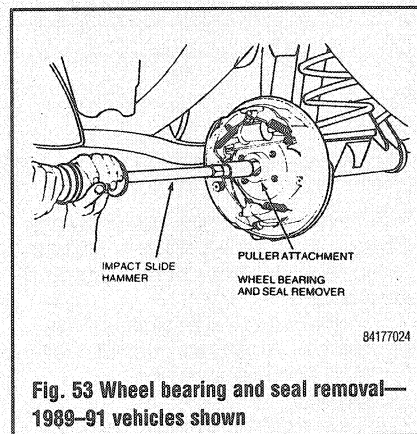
Wheel bearing and seal removal—1989-91 vehicles shown
